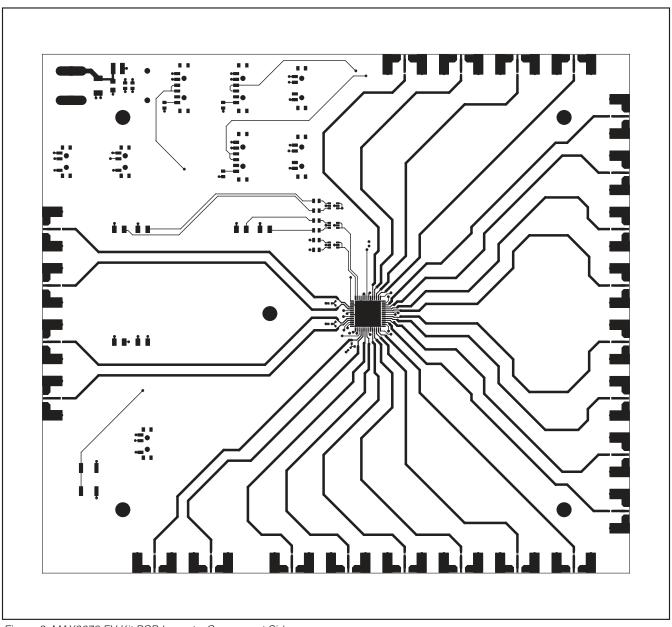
MAX3673 EV Kit PCB Layout—Component Side
